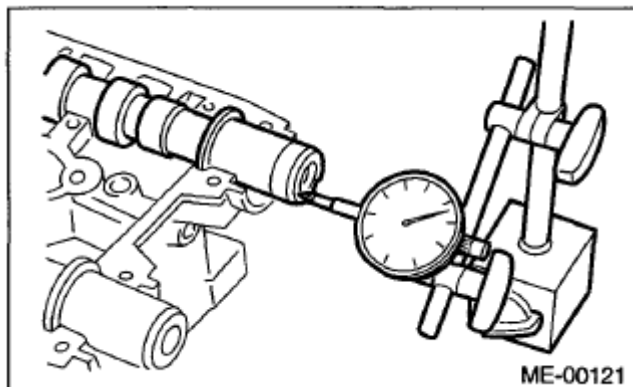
Measuring Thrust Clearance With Setting Dial Gauge At End Surface Of Camshaft
